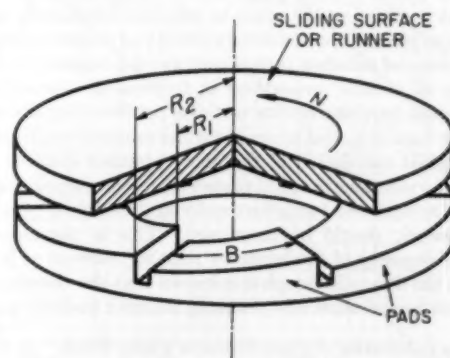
DIAGRAMMATIC SKETCH OF FIXED-PAD THRUST BEARING
